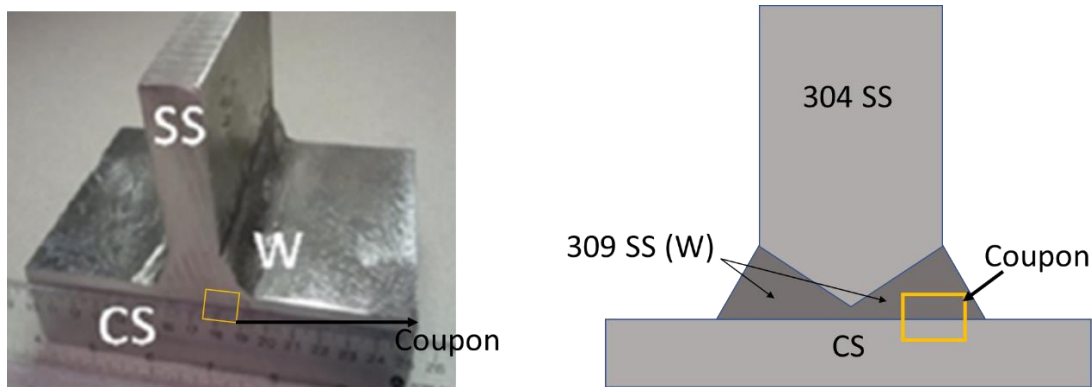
The carbon steel-stainless steel weld joint block provided by Ontario Power Generation, and the location from which the coupon was cut.
